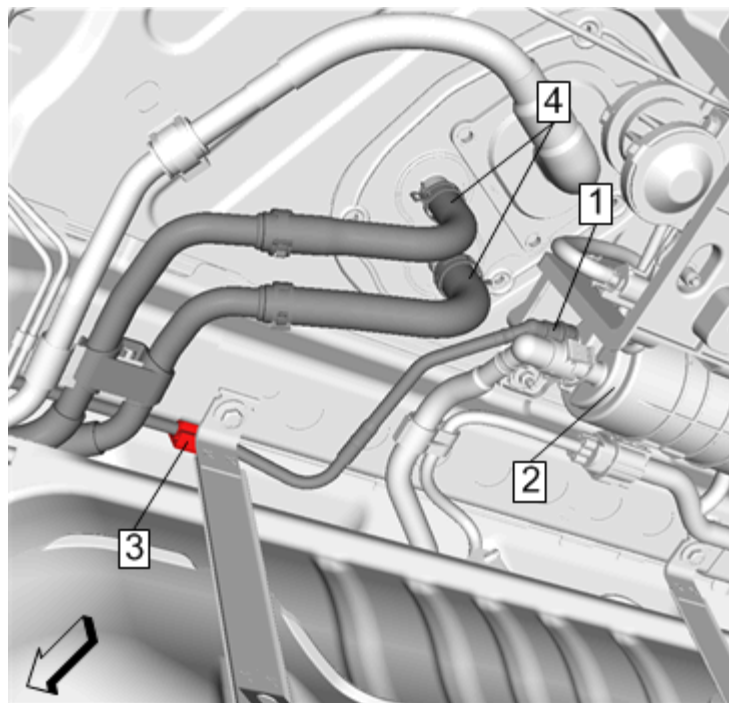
Drive Motor Generator Control Module Cooling Outlet Hose
